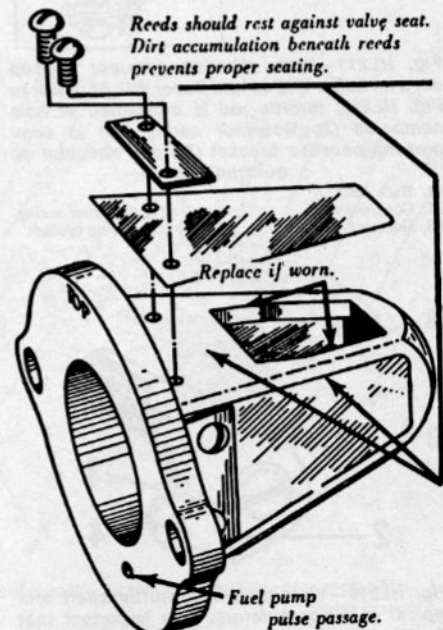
Inspection points for pyramid reed seat and reeds.
